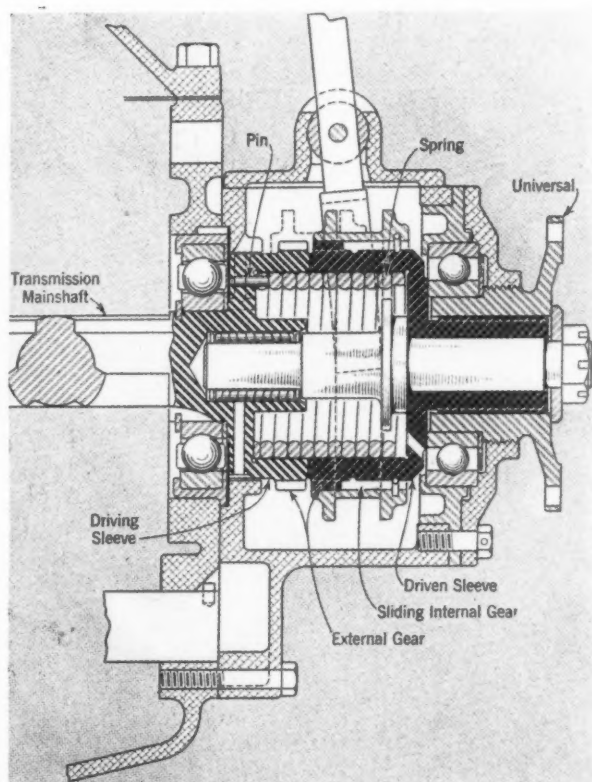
Free-wheeling device of the expanding spring type. This also can be "locked out" when desired
